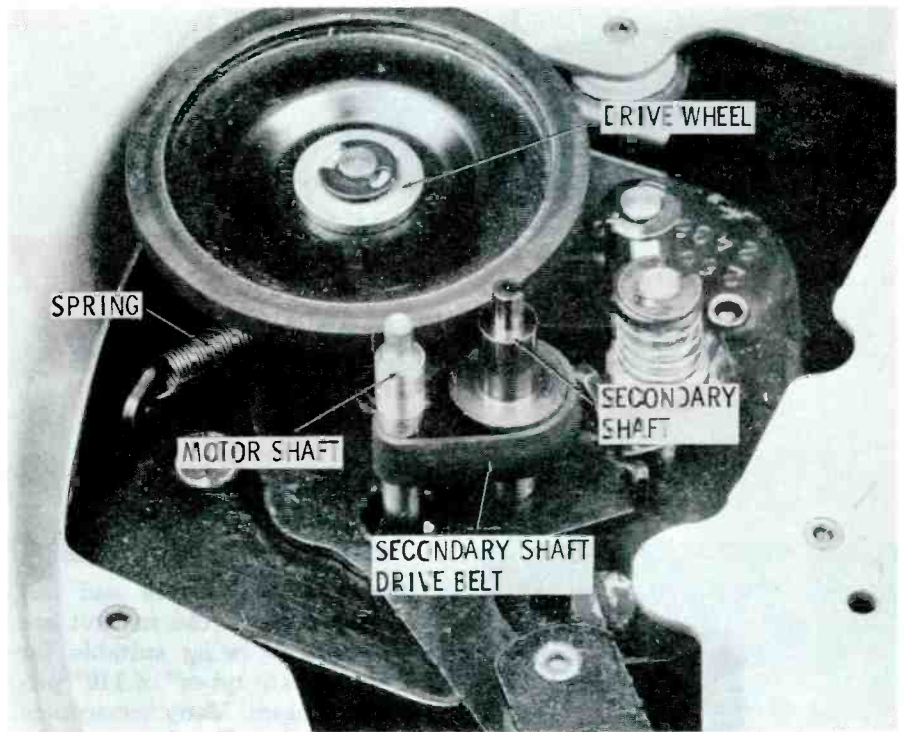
Drive assembly on RC 607. Both motor and secondary shafts are stepped.
